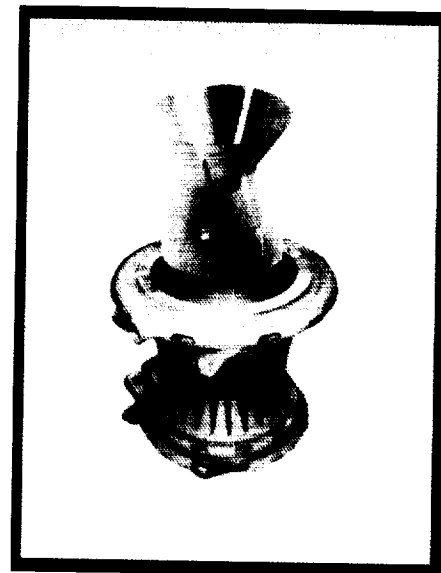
Main combustion chamber fabricated by bonding formed platelet liner in cast structural jacket.
